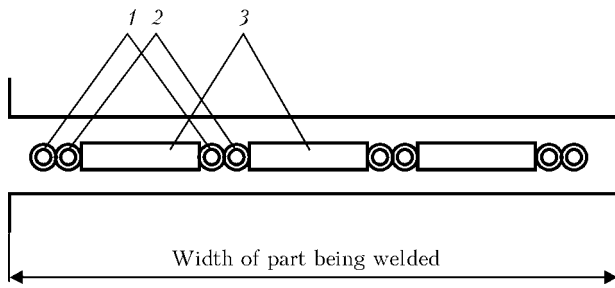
Appearance of welding machines ASH-110 assembled into blocks: 1, 3 – working and doubling welding machines, respectively; 2 – traverses for fastening the machines
